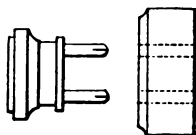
Portable Lamp Connector carrying Cut-out.
